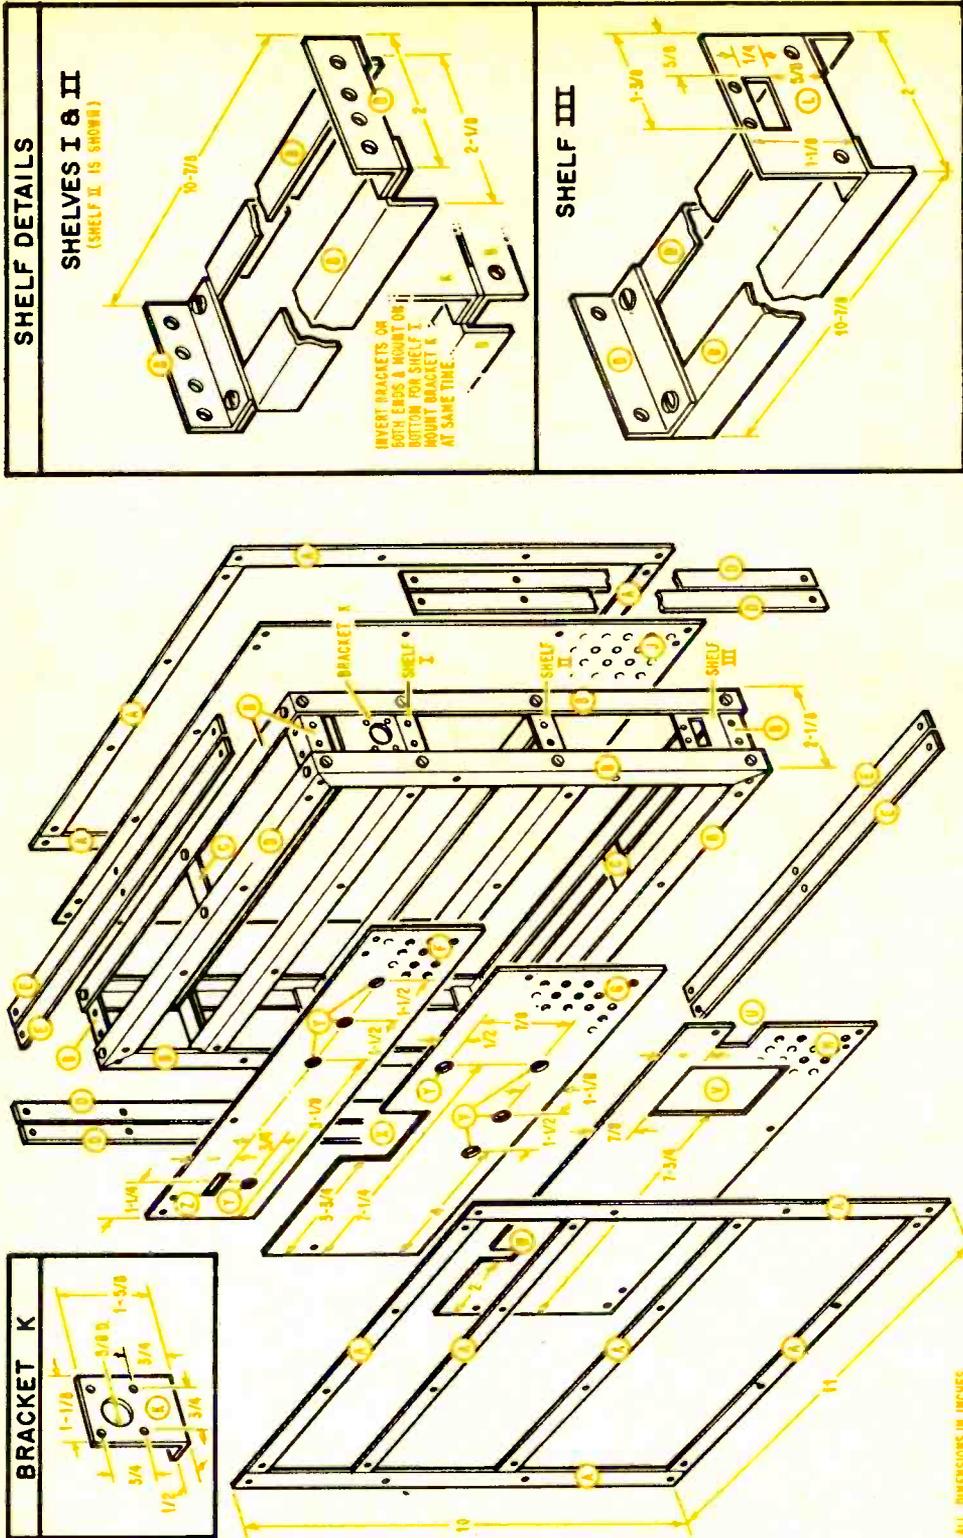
The main frame is built entirely of 1/2x1/2x1/16 in. aluminum angle and 1/2x1/16 in. aluminum strip. Cut the angle to the lengths specified for all horizontal and vertical members then cut the crosspieces (B). Assemble frame with two bottom crosspieces only using flat-head screws, lockwashers and nuts.
